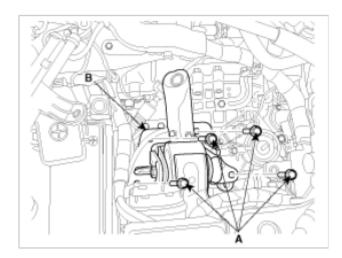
Identifying Transaxle Mounting And Mounting Bolts
